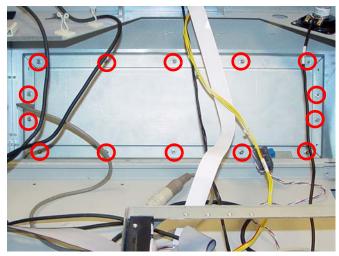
Remove the nuts that secure the keyboard cover to the tray
